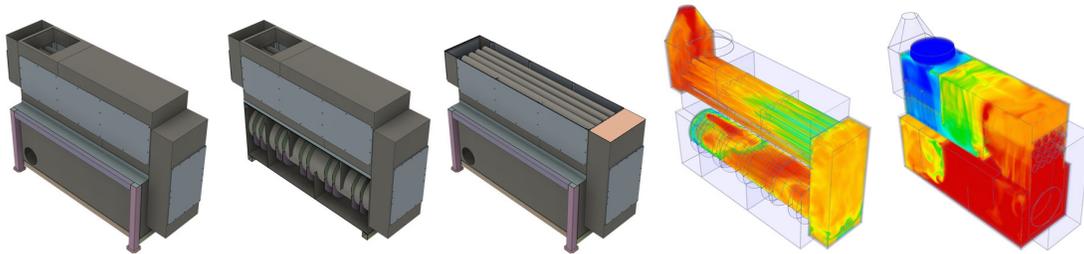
Shell-and-tube heat exchanger designed for the pneumatic dryer.
